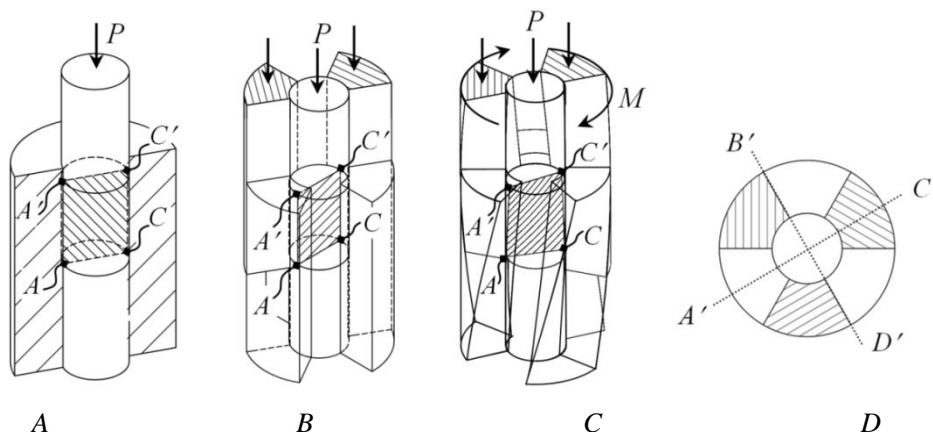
Method of pressing powder materials in closed molds: (a) – conventional uniaxial single pressing, (b) – collector pressing, (c) – collector pressing of spiral type and (d) – cutting line on the top view for inspection
